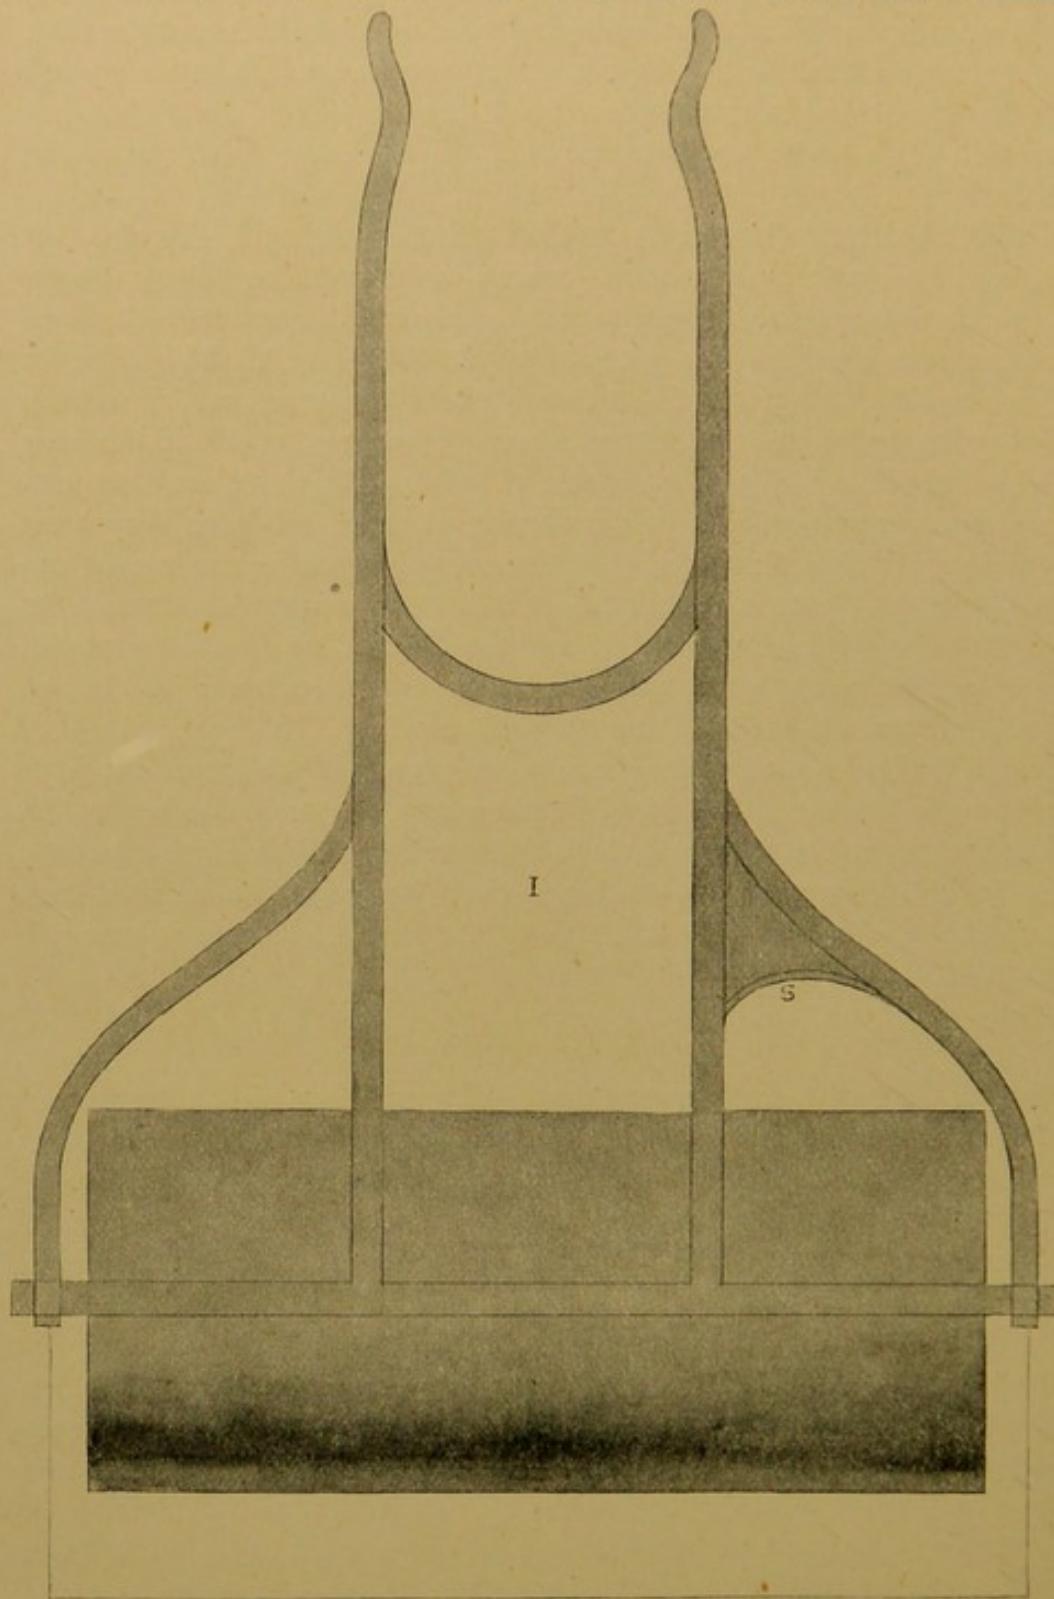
Showing general plan or bearing of roller. (*Protection for this machine and method has been secured.*)
